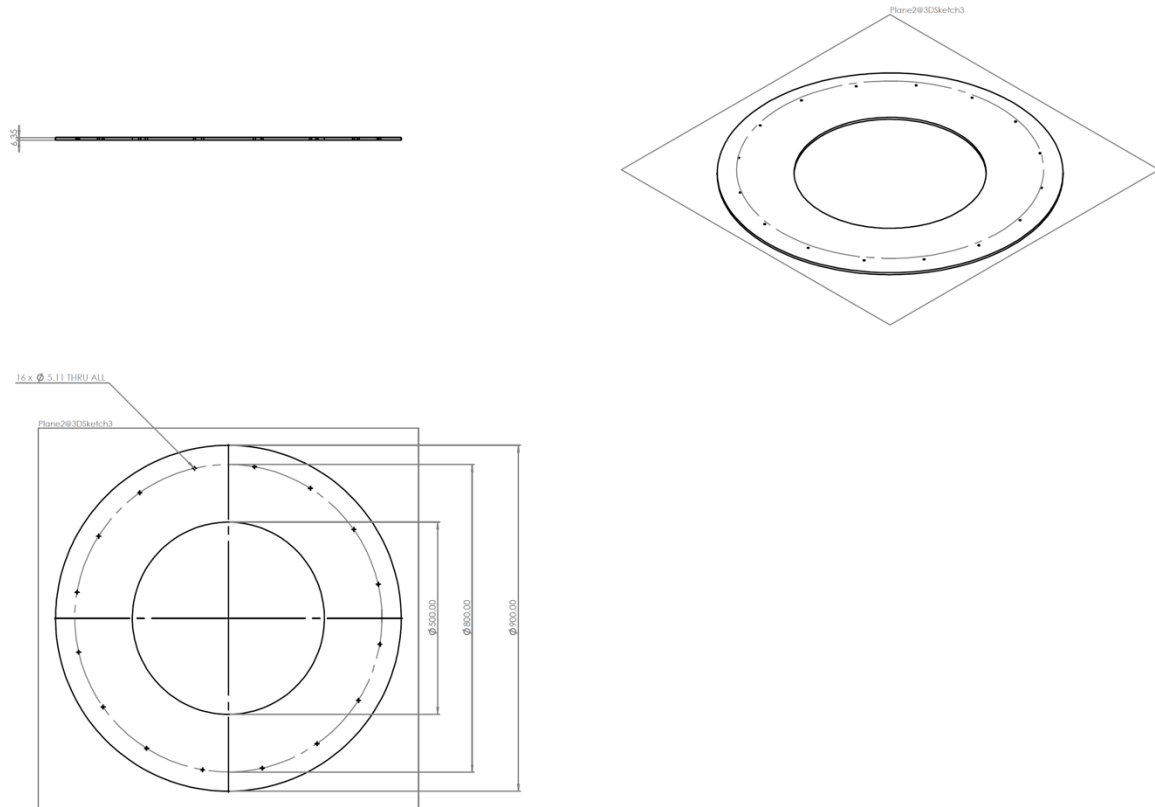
Sketch of aluminum clamp for vacuum test chamber
